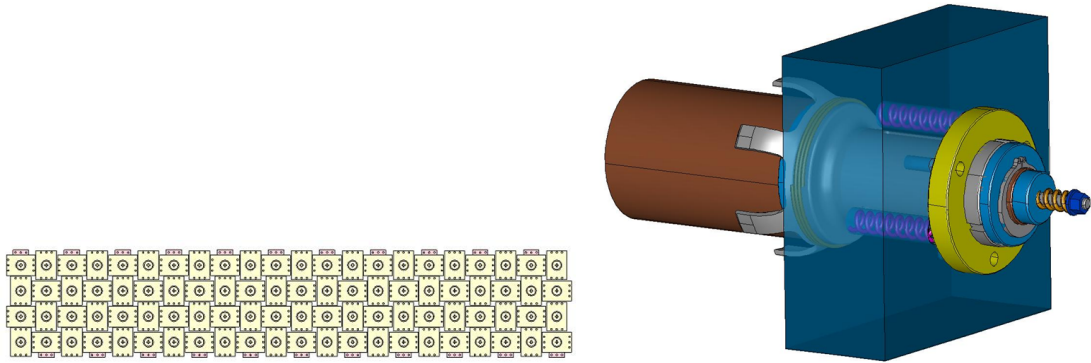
A possible 12-cathode cells layout with two building block units (left) and a possible end fitting design suitable for automating wiring.
